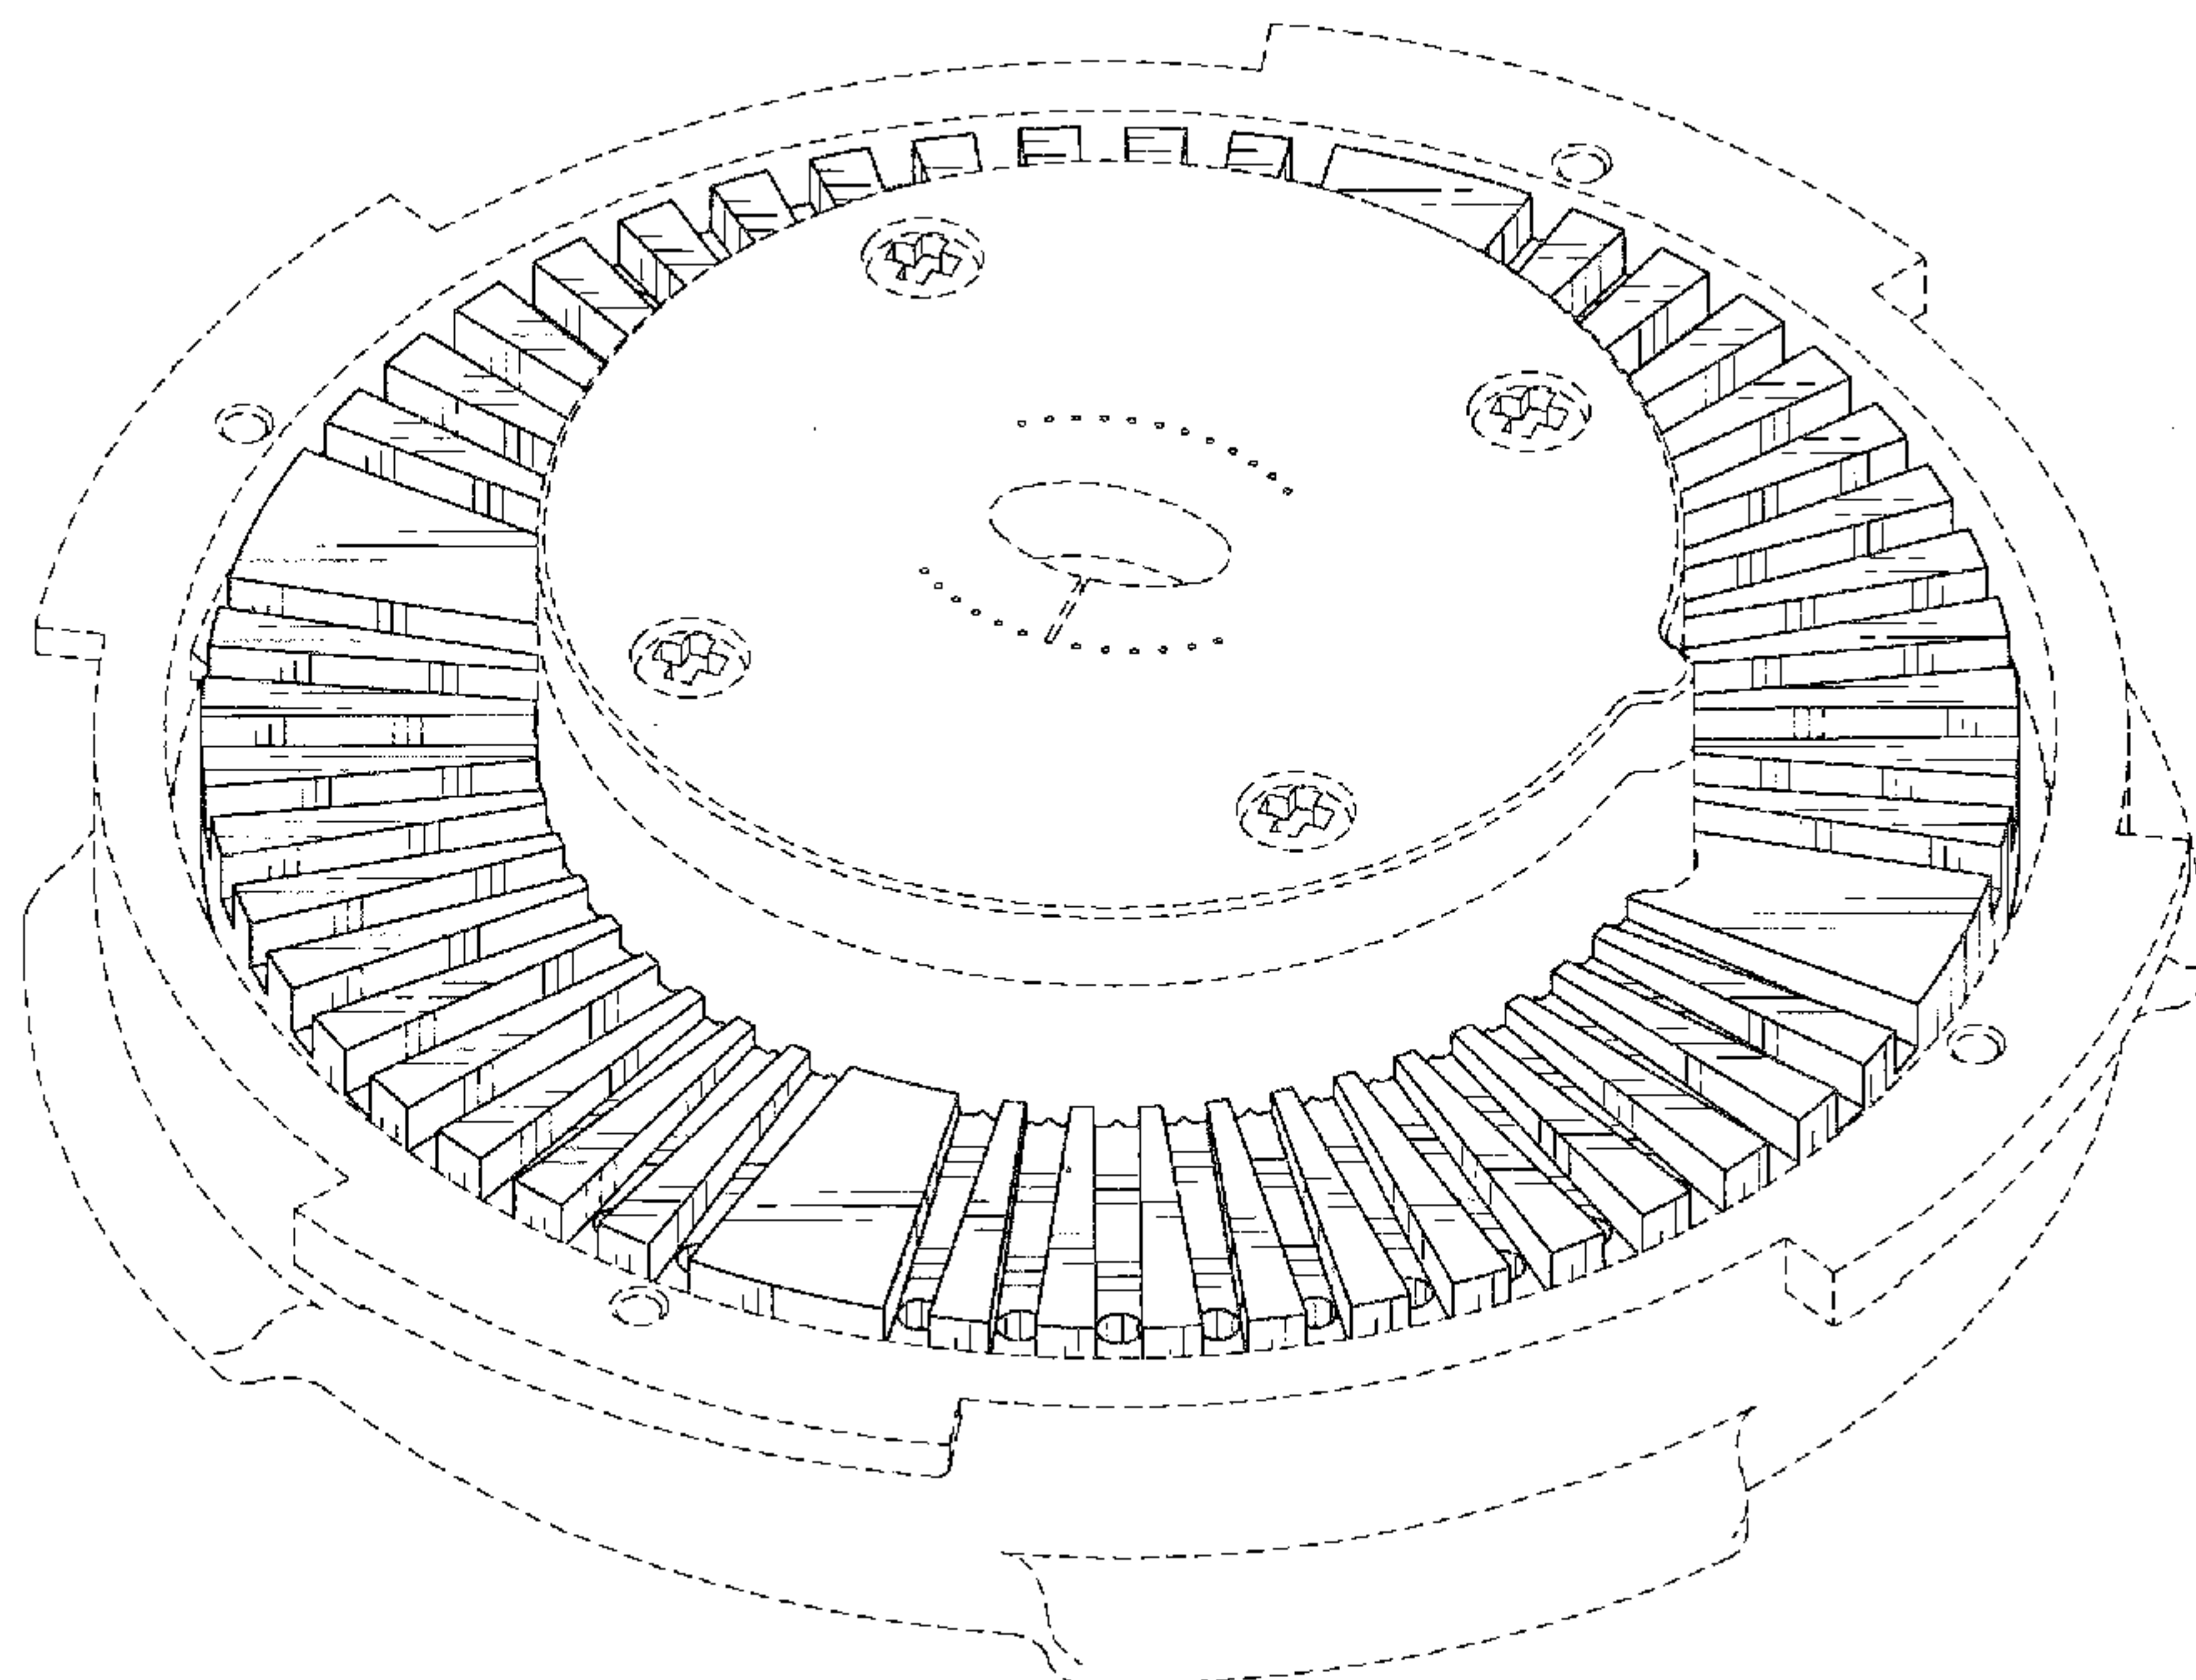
is side view that shows some unclaimed environment of the probe test core shown in FIG. 1; and,
